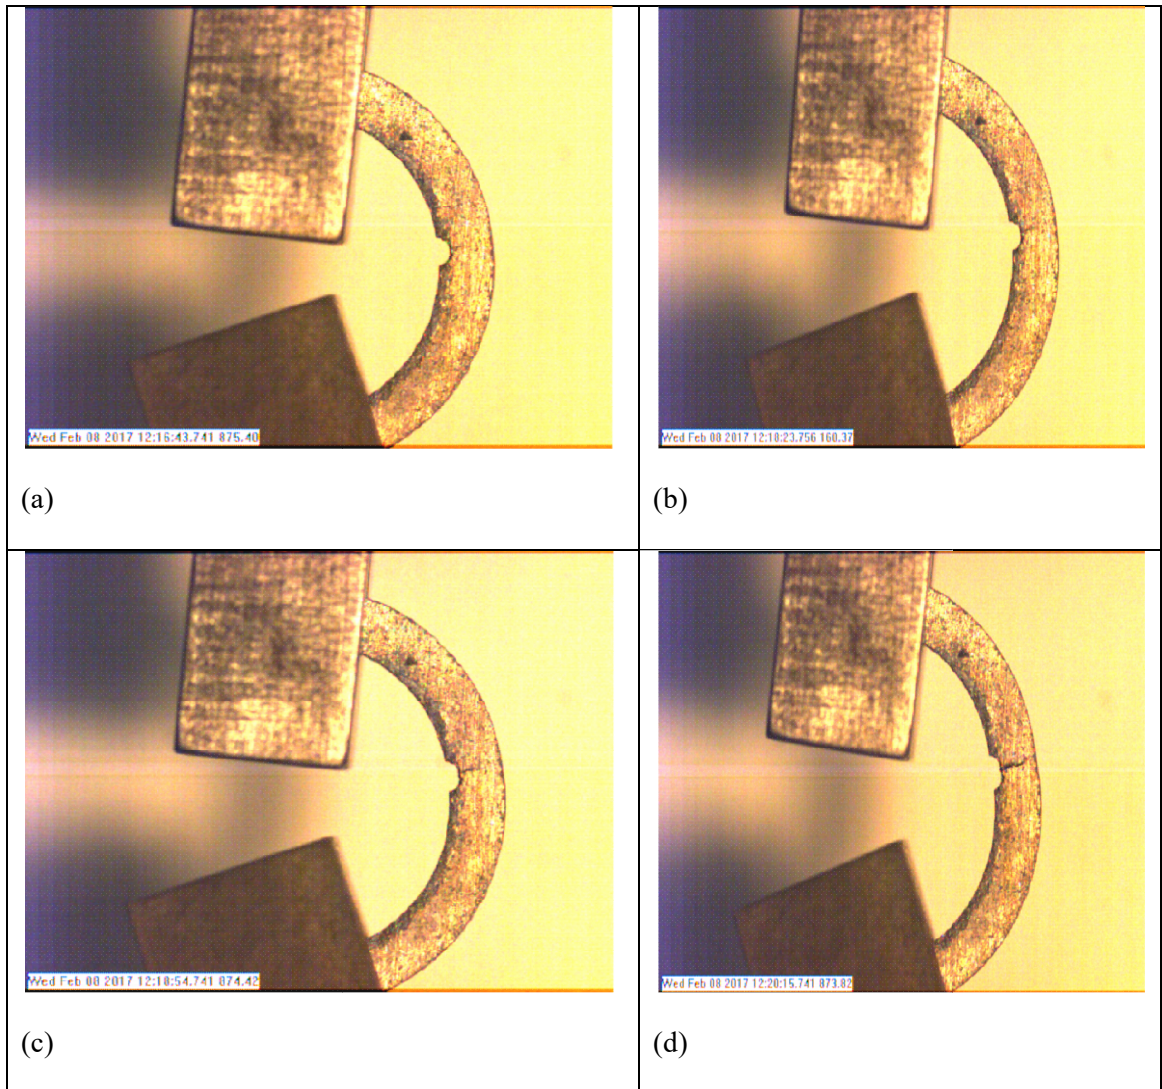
Several frames from the high-speed recording of the fracture toughness test of a ~400 micron nickel-aluminum powder (swaged with no core) ring with the loading fixtures attached at the top and bottom of the specimen: (a) frame captured from the beginning of the test; (b) frame captured at the onset of fracture; (c) frame captured just before complete fracture and failure; (d) frame showing the end of the test.
